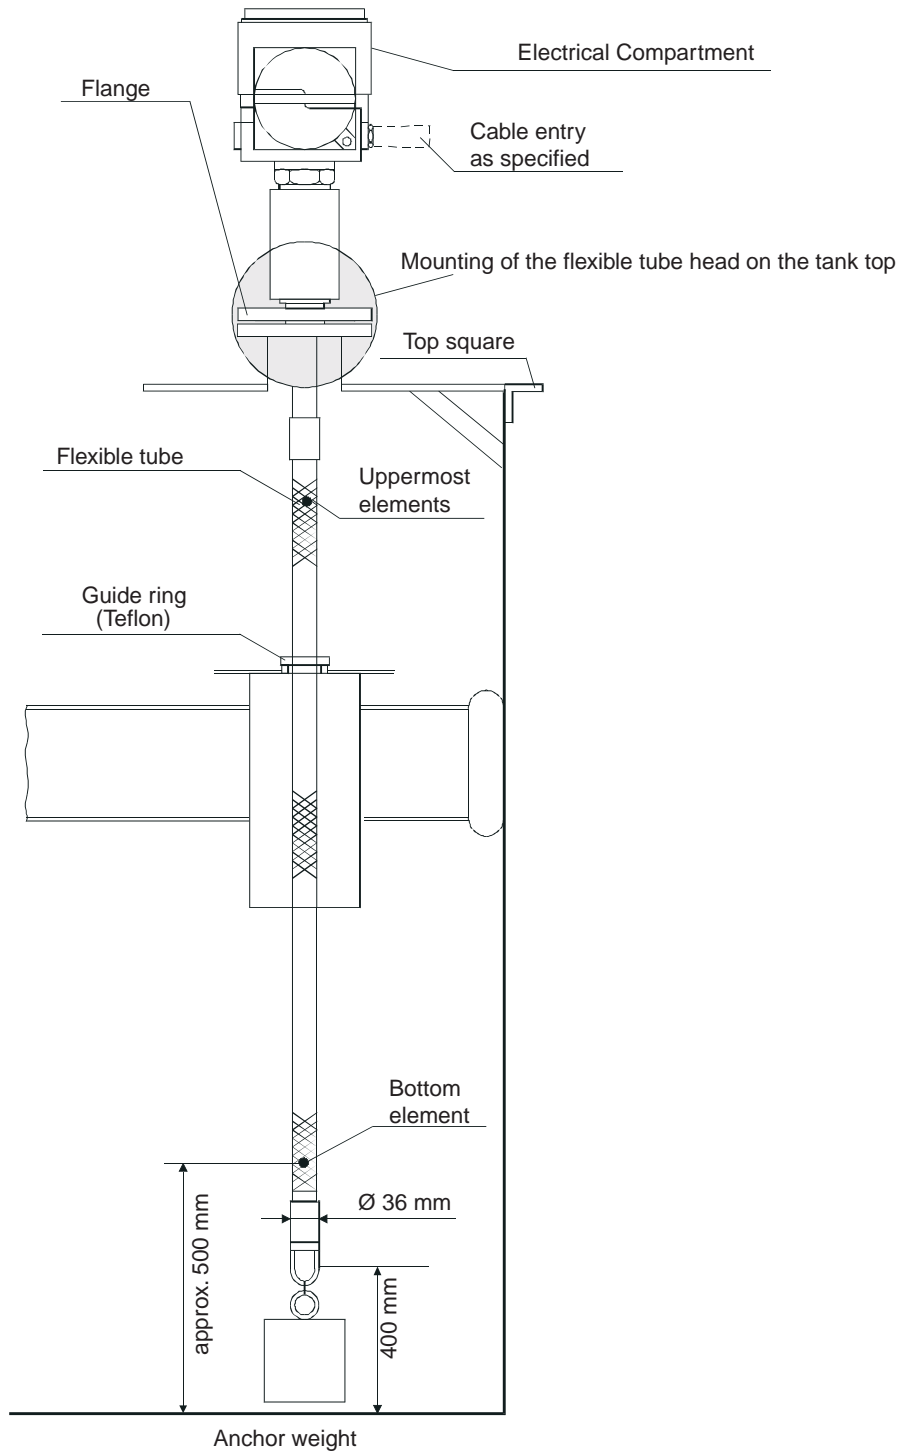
Mounting on a floating roof tank by the guide ring method
